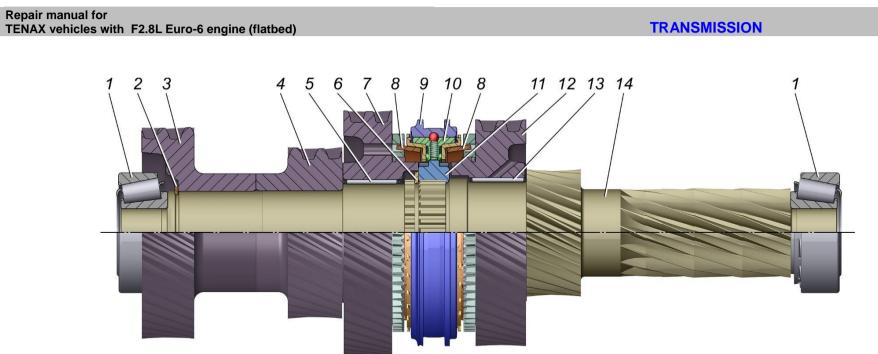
Countershaft assembly: 1 - roller bearing; 2, 6 - retainer rings; 3 - countershaft drive gear; 4 - countershaft 3 speed gear; 5 - needle roller bearing without rings; 7 - countershaft 6 speed gear; 8 - set of 5 and 6 speed gears synchronizer locking rings; 9 - 5 and 6 speed gears synchronizing sleeve 5 and 6; 10 - synchronizer T-block; 11 - 5 and 6 speed gears synchronizer hub; 12 - 5 speed countershaft gear; 13 - split-cage roller needle roller bearing without rings; 14 - countershaft.
